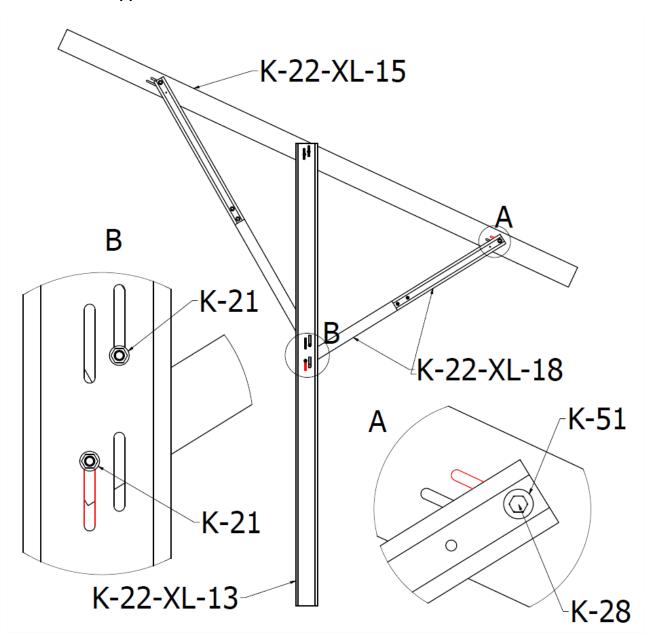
Assemble the shorter arm to the main beam and support (projection I)
